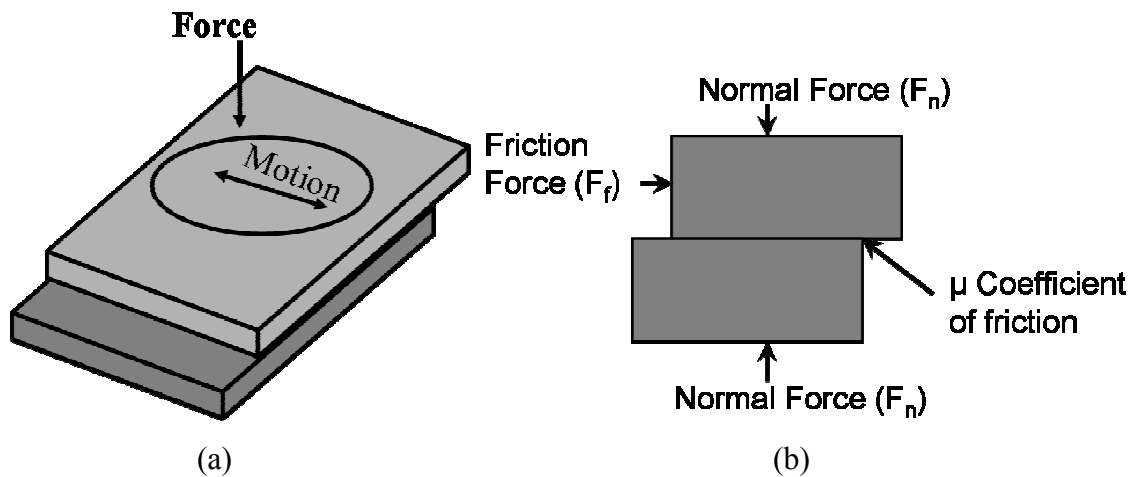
(a) Cartoon of welding showing LOCAL motion (b) small element removed from center of (a)
